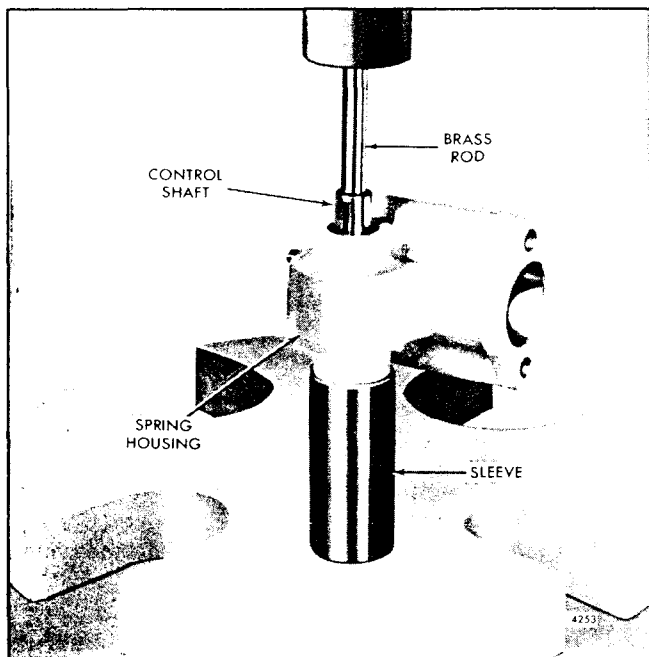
Removing Shaft and Bearing from Spring Housing
